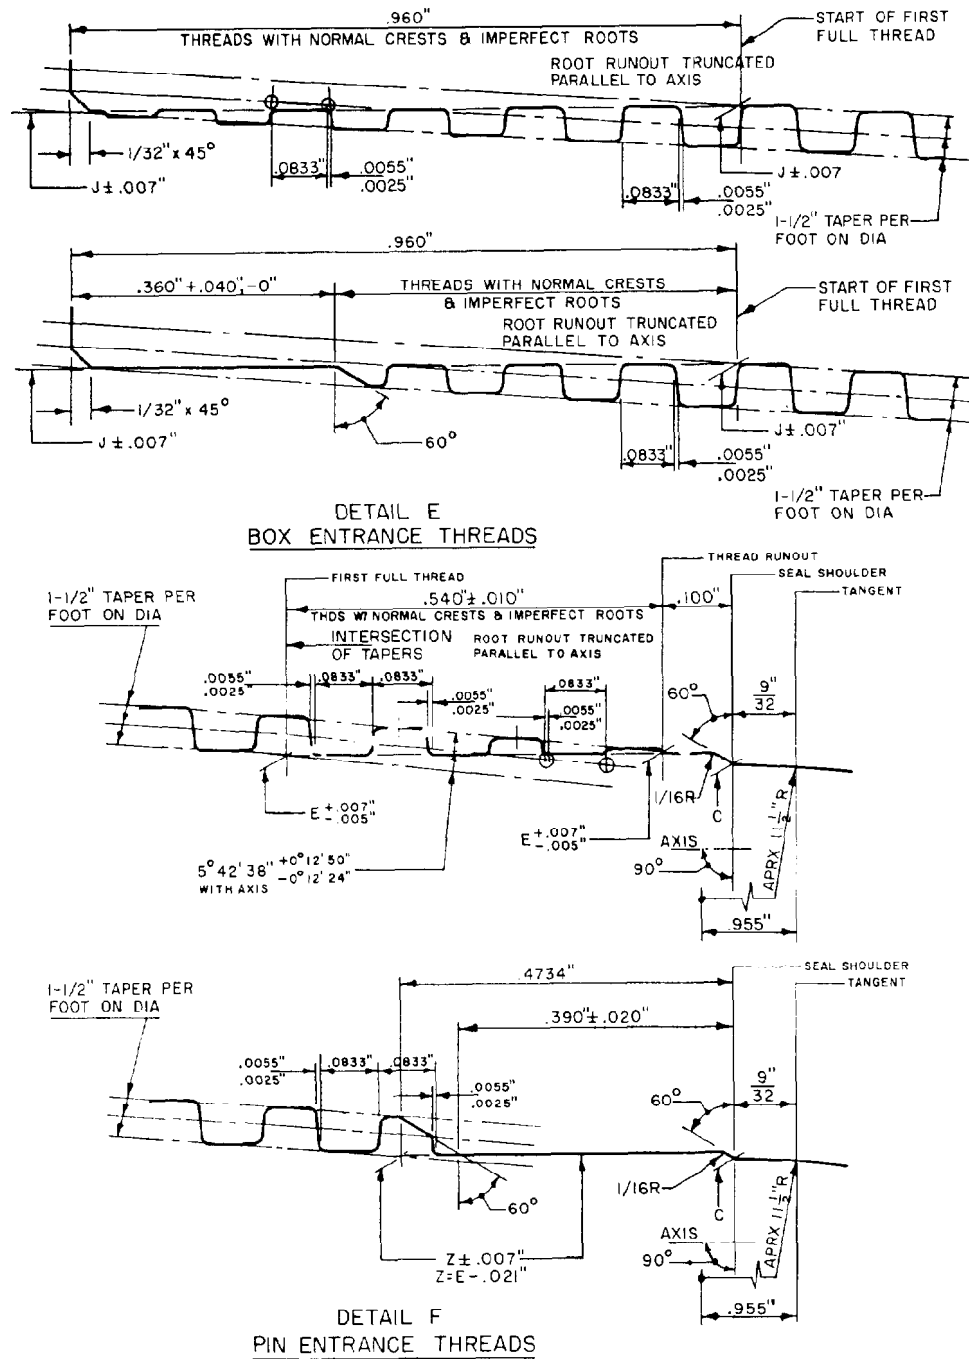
Box-and-pin entrance threads, extreme-line casing joint sizes 5 through 7 $\frac{5}{8}$ in.
